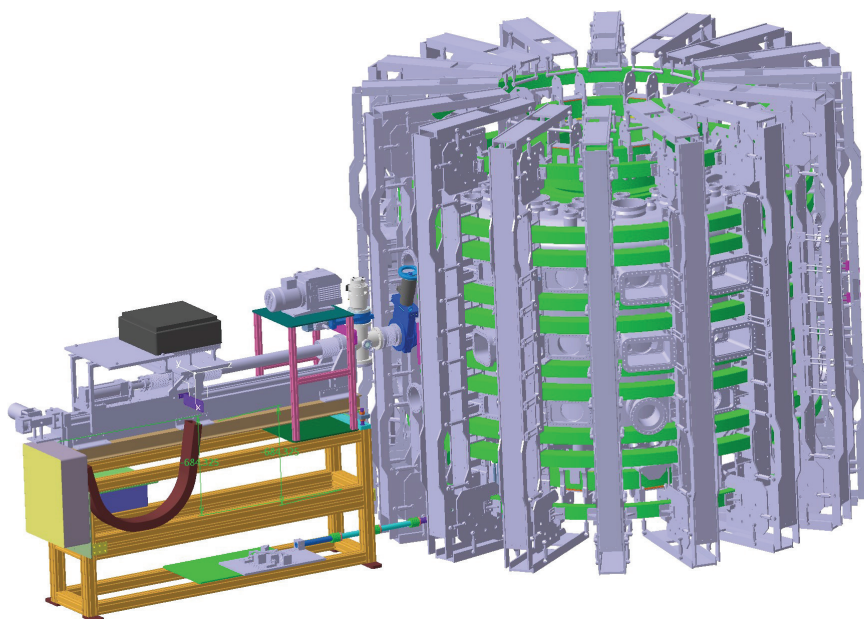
Technical drawing of the RP assembly connected to TCV sector 3 middle port.
